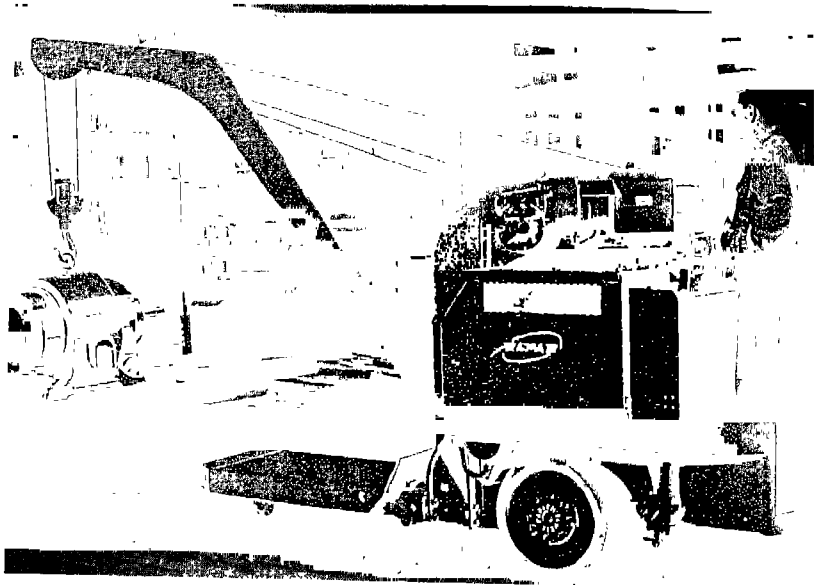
An Industrial Truck Equipped with a Crane. (Courtesy, The Elwell Parker Electric Co.)
